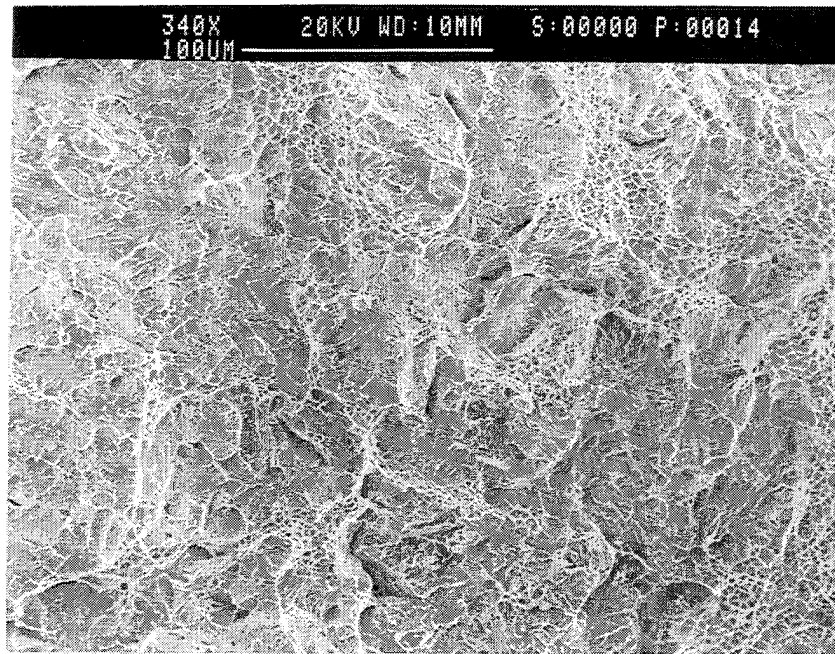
MV5 - GMA Weld Using C5 Cover Gas Showing Intergranular Cracking and Ductile Areas
